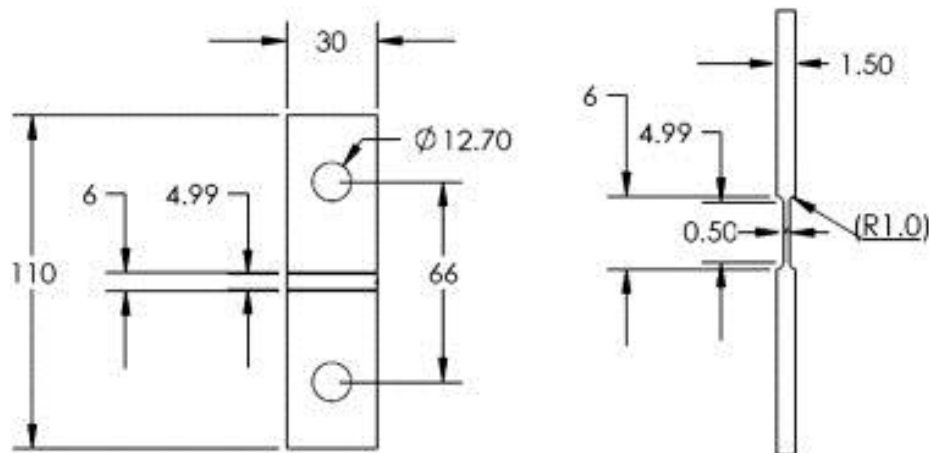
Geometry of a flat-grooved tensile specimen for plane-strain fracture, adapted from (Li and Wierzbicki 2010)
